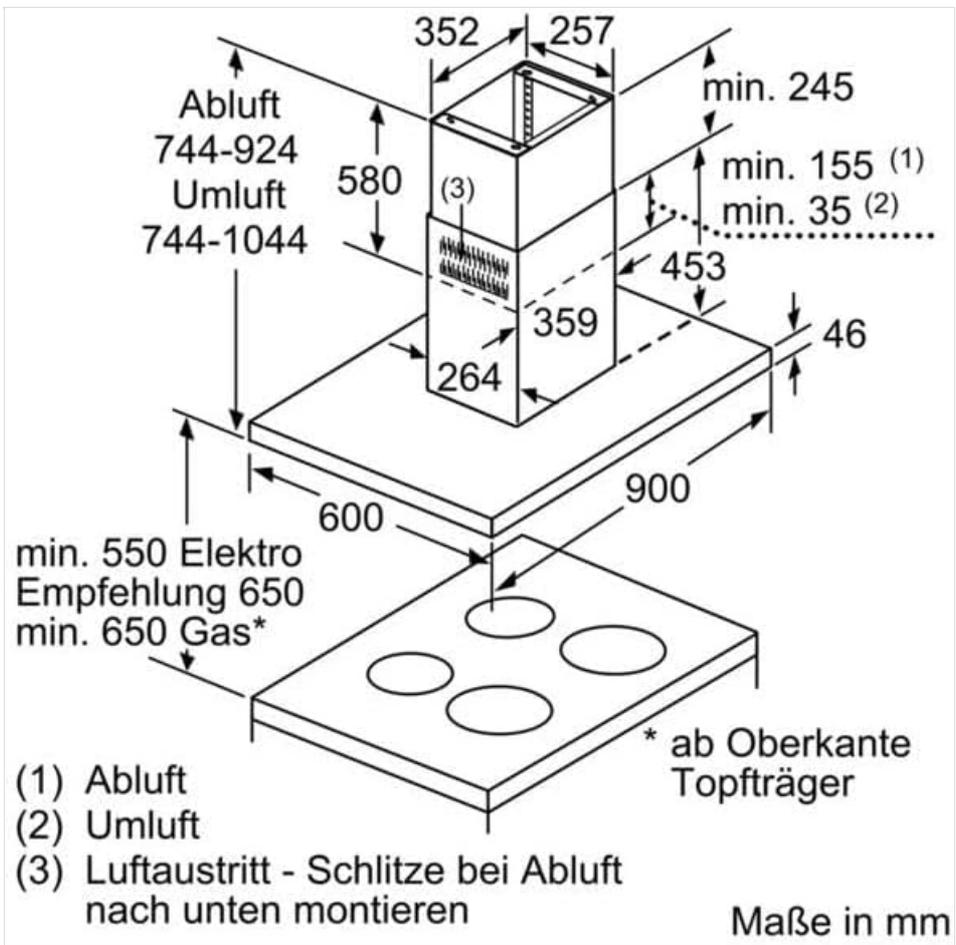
Overall dimensions and clearances for installation (measurements in mm).
